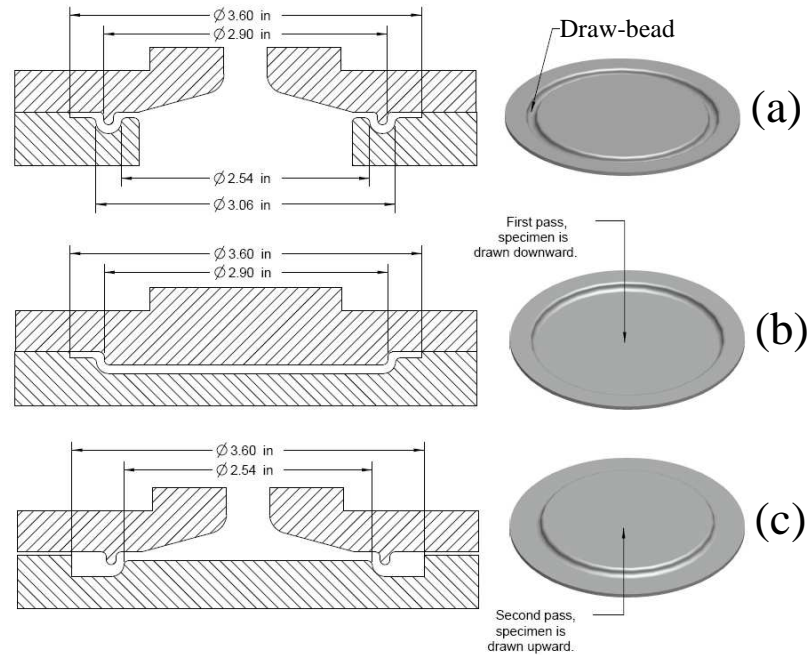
Forming of the draw-bead by two deep-drawing passes: (a) sheet metal blank after two-step deep drawing; (b) first pass, blank is drawn downward; (c) second pass, blank is drawn upward.
